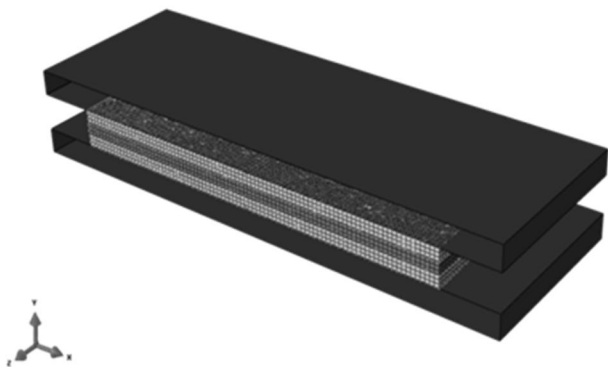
Simulation of three layer clad sheet forging by finite element method in ABAQUS/CAE
